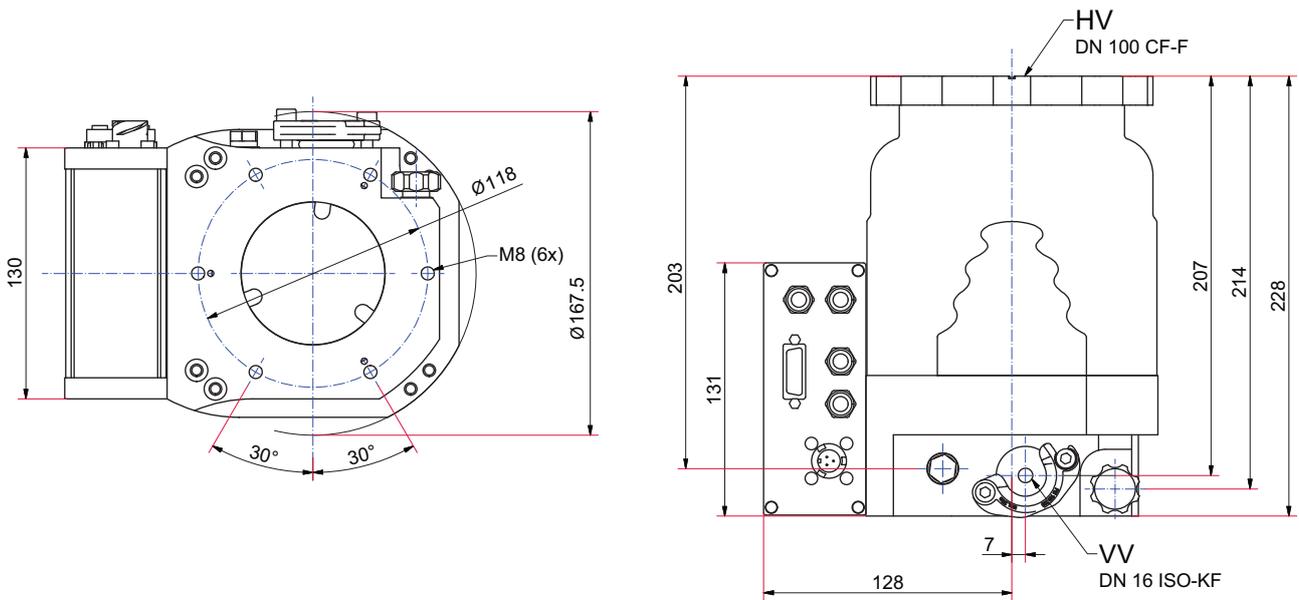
Dimensions HiPace 350 | TC 400 | DN 100 CF-F
